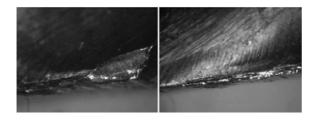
Microscope-based view of the performed tool's edge after 367 drills (excessive wear)
